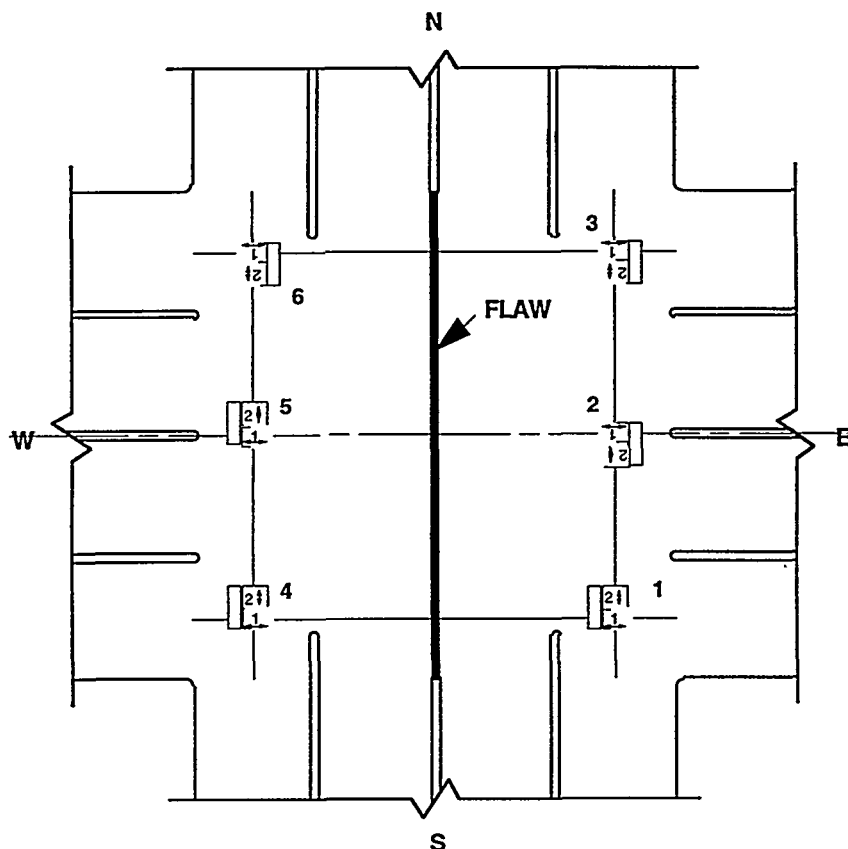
Pattern of strain gages used on test section of cruciform specimens
